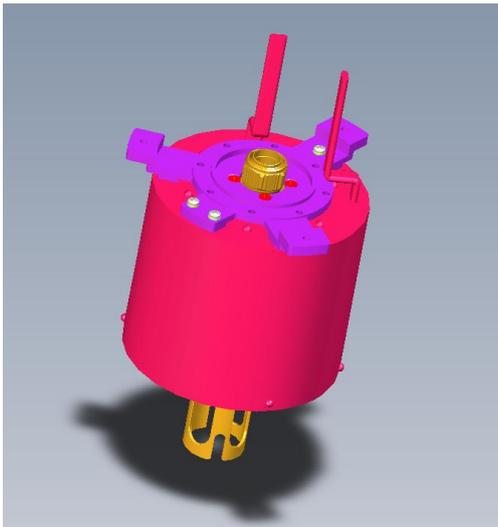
Slip-Ring/Rotary-Joint Assembly
